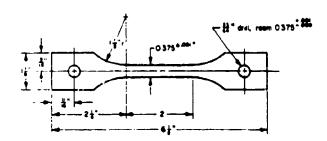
SHEET CREEP - AND STRESS-RUPTURE SPECIMEN
